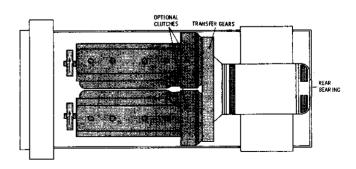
Typical Twin Engine Drive Arrangement—Single Bearing Generator
